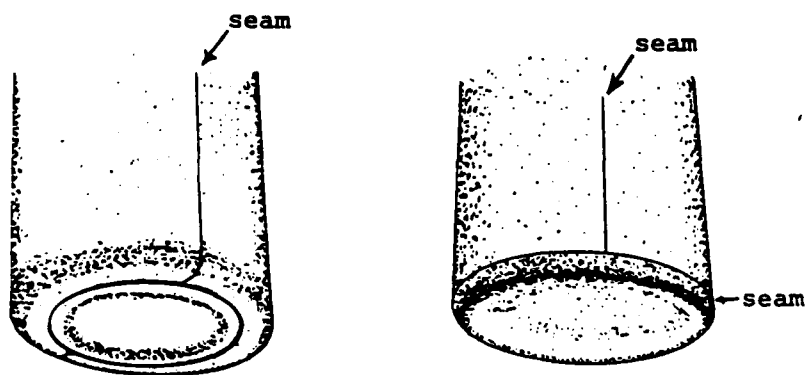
Post Bottom Mold (left) and Cup Bottom Mold (right).
